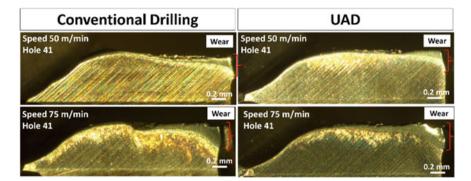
Tool wear images just right after CFC drilling and before drilling titanium
